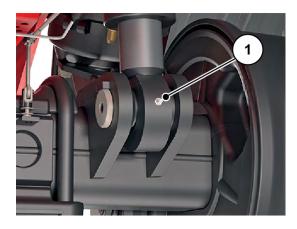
Joint bearings on hydraulic cylinder for axle suspension
